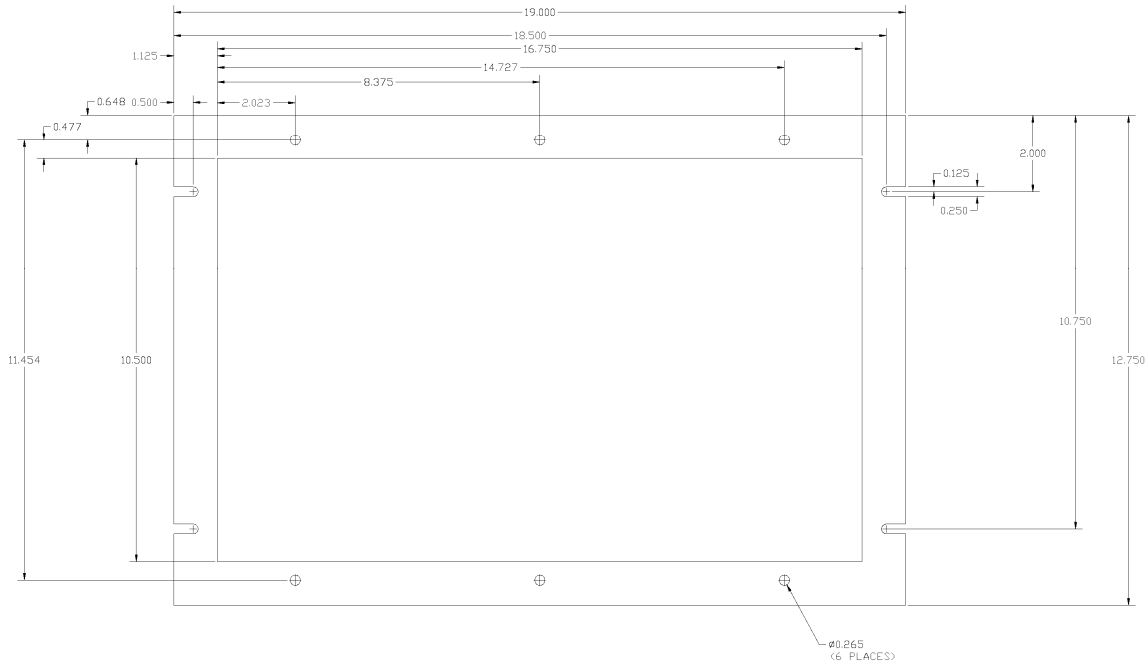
Service Panel Optional 19 Inch Mounting Panel
